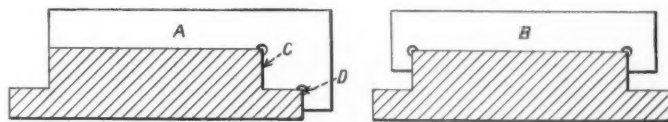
Gage for Measuring Packing Ring Space in Piston Valve Bull Rings
